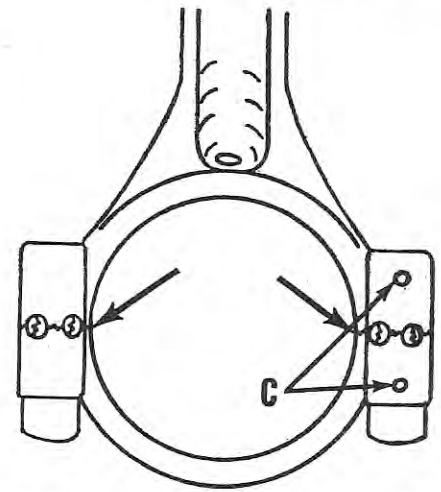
Connecting rod is "fractured" at pin of arrows. When installing cap, make sure that correlation marks (C) are together then work cap back and forth a slight amount until fracture lines mesh.
